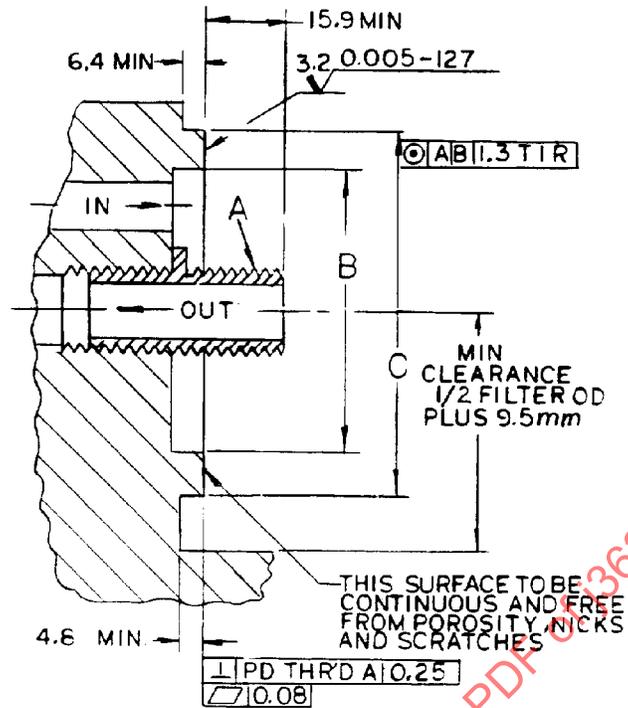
LUBRICATING OIL SPIN-ON FILTER-BASE MOUNTING
